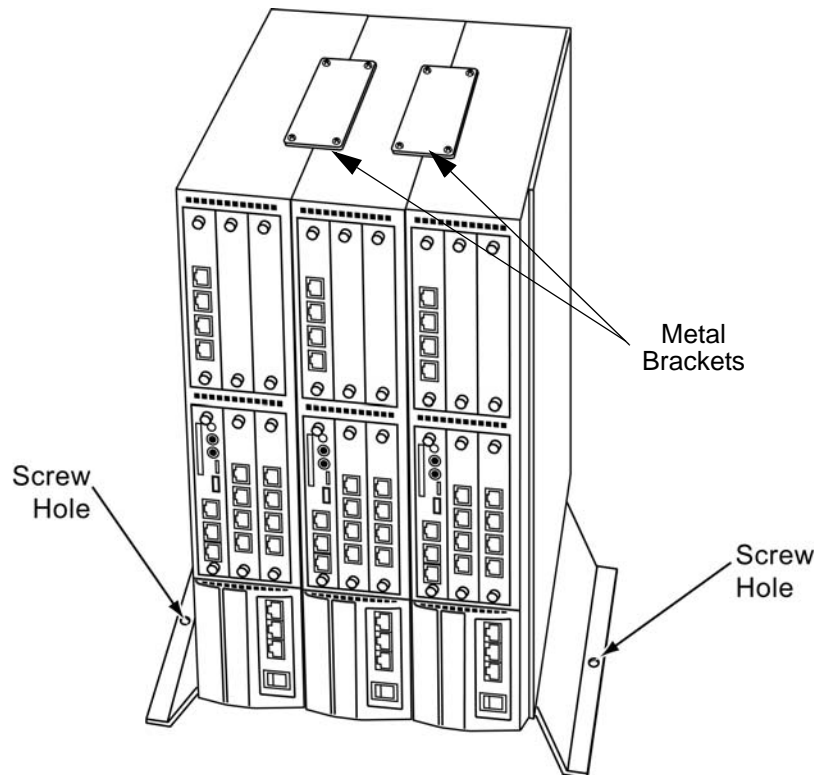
Install Additional CHS2U JOINT BRACKET KIT
